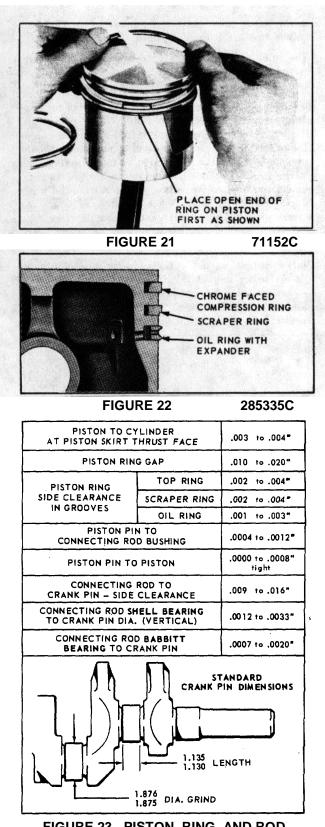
PISTON, RING, AND ROD CLEARANCES CHART
